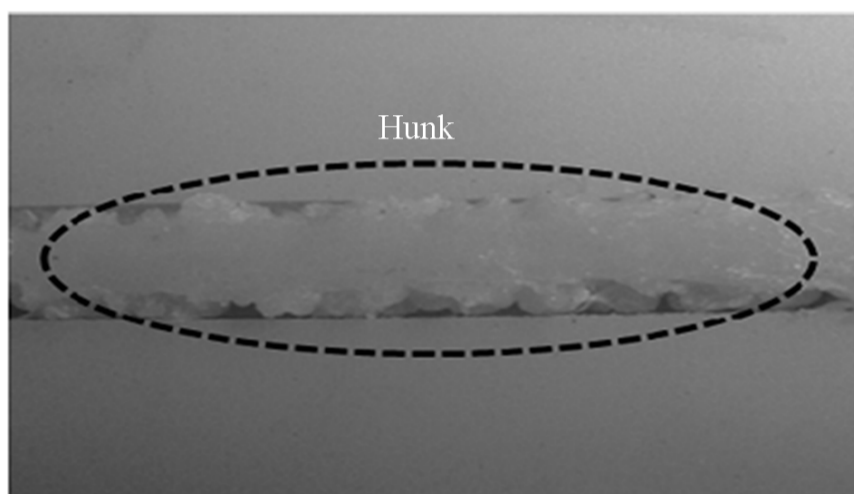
Create a hunk in the line of welding effect on the choice of diameter 18 mm tool shoulder (Test No. 11)
